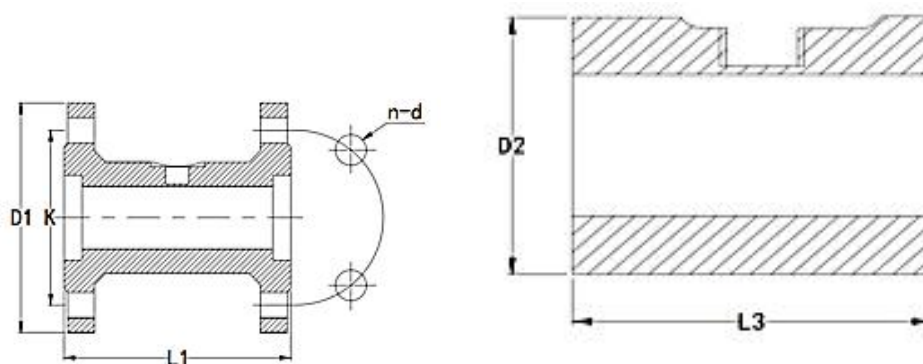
(A) DN15~DN200 flange connection turbine flow sensor size drawing
